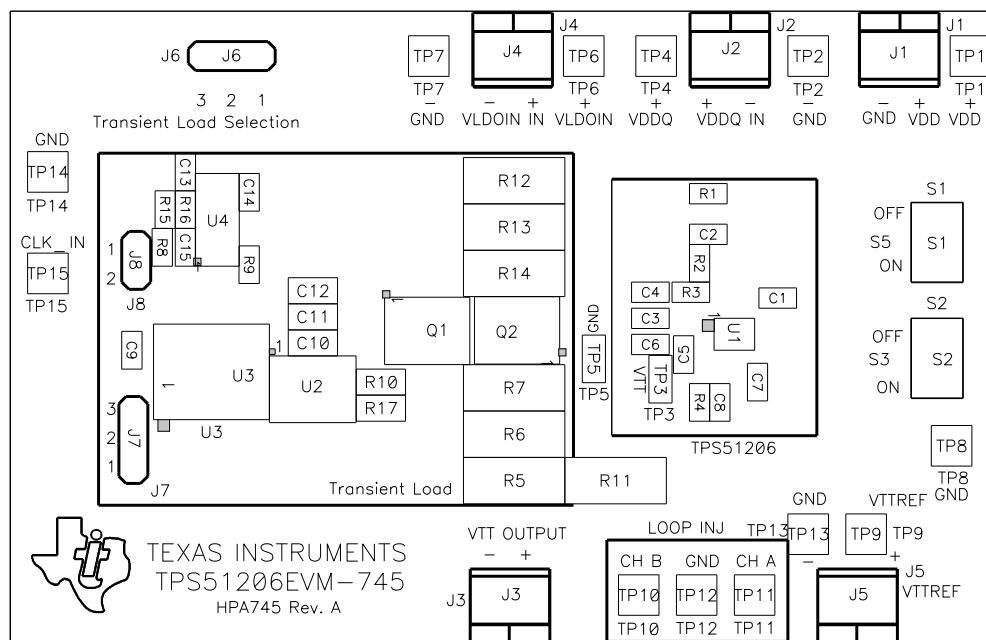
TPS51206EVM-745 Bottom Layer Assembly
